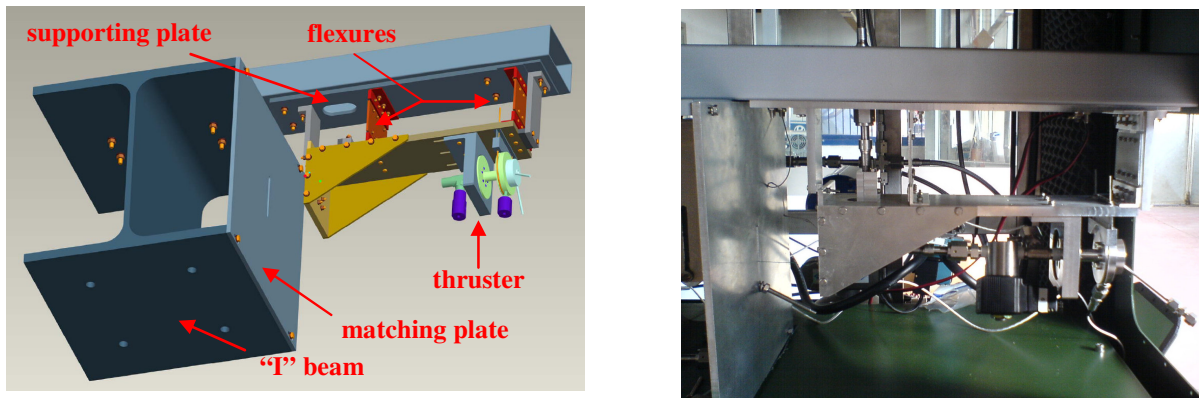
3-D-drawing (left) and a picture of the test bench assembly (right).
